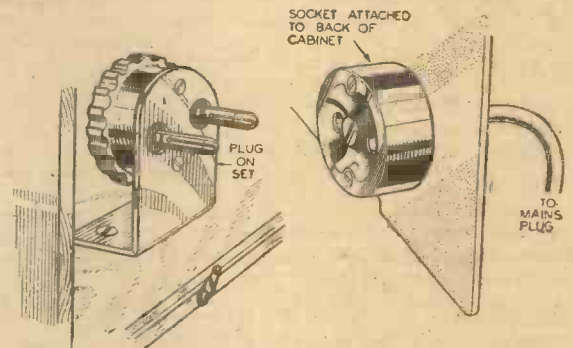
To avoid shocks when testing a mains set, a plug and socket may be included in this manner.
